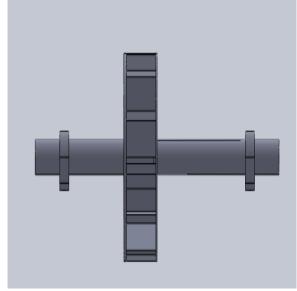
, Axle, Impeller, and head cushion assembly (side view)
